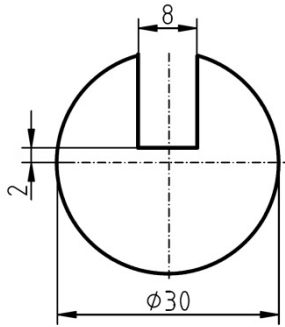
Dimensions of the cylinder with the groove used as testing element
